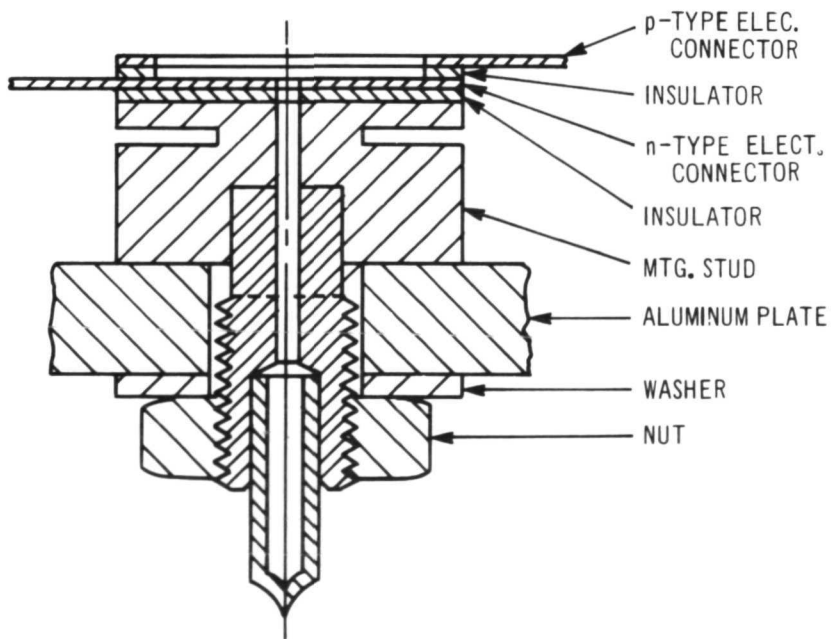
Cold Stack Design (Copper T - Steel Screw) Aluminum Plate.
